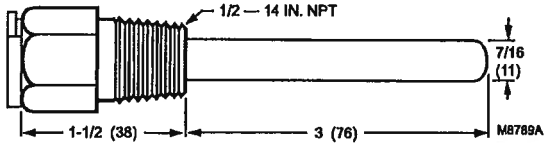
Approximate Immersion well dimensions in inches (mm) for all models except L4006C and L6006B.
